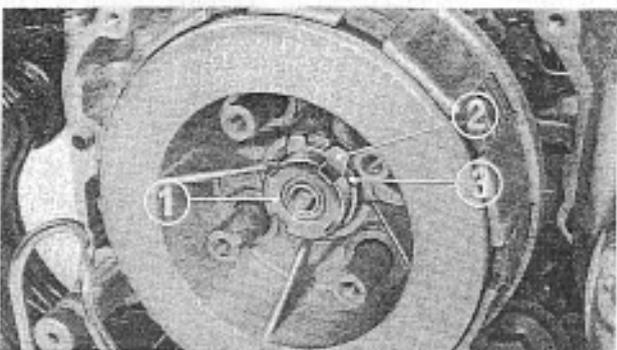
① 16mm lock nut ③ Lock washer
